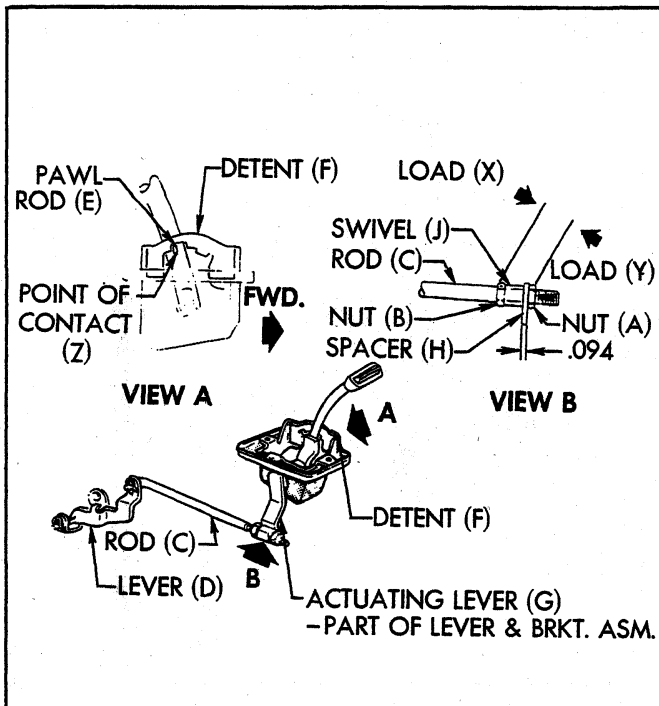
PG - Camaro Floor Shift Linkage Adjustment
